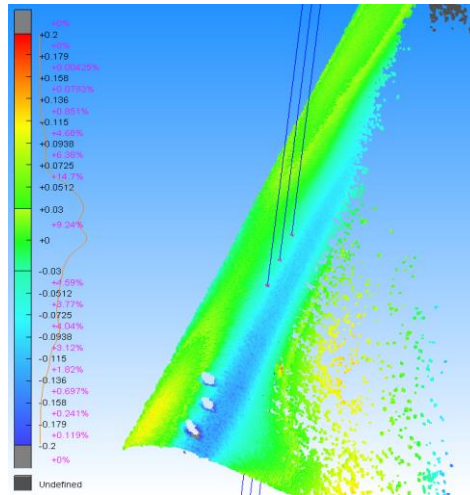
example of partial measurement of turbine blade profile (i.e. the same indicated above in Figure 77), limited to the fan shaped holes machining area.
